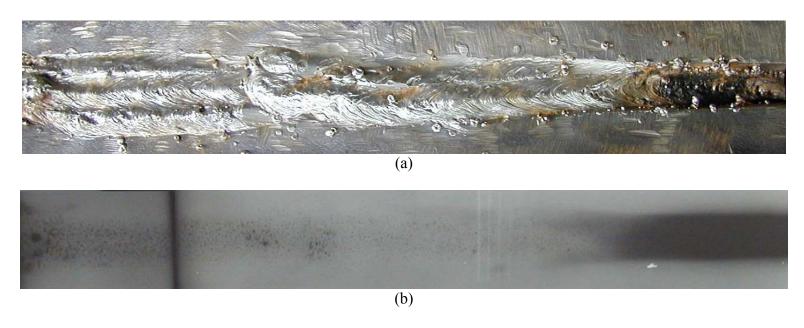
(a) V-groove wet weld deposited with E6013 electrode type on API 5L Gr. B steel at 50 m and (b) its radiographic image.
